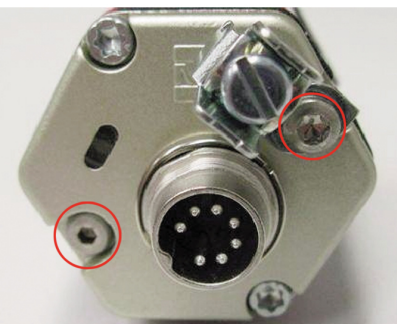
Secure screws with thread locker, check the correct position of the gasket
